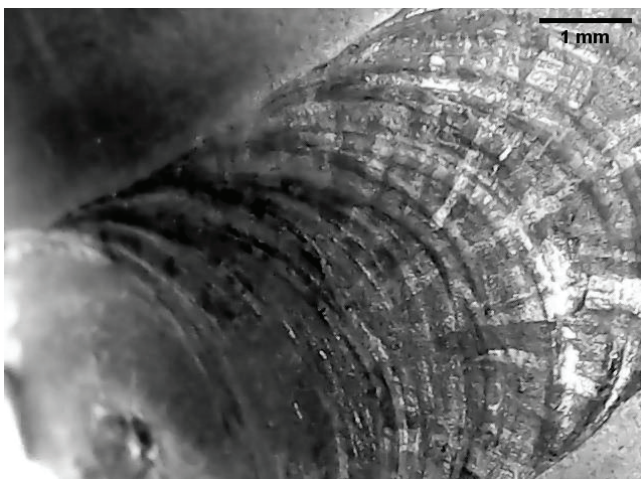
Appearance of the weld face when viewed at 20× magnification; weld made automatically
